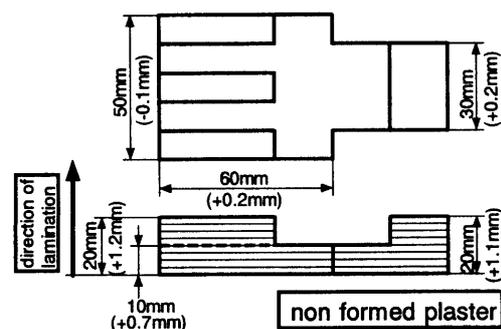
Size change of casting from sheet lamination model for non formed plaster mold
